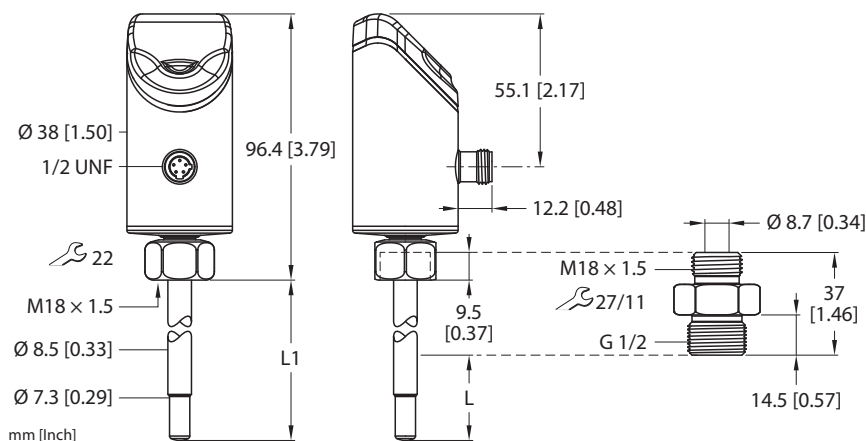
Dimensions — sensor with 1/2" UNF connector and G 1/2" screw-in adapter
